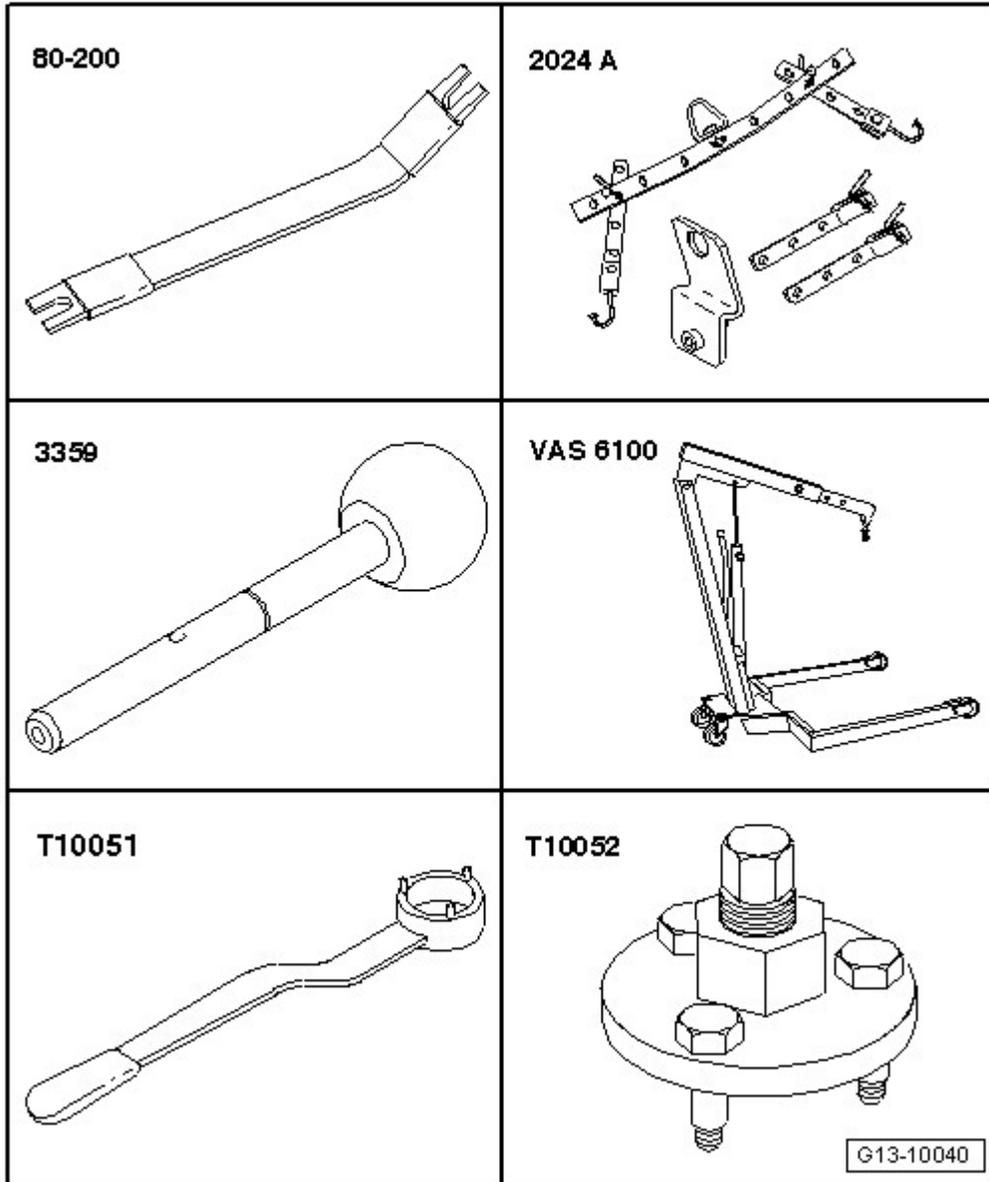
Special Tools And Workshop Equipment (1 Of 4)
